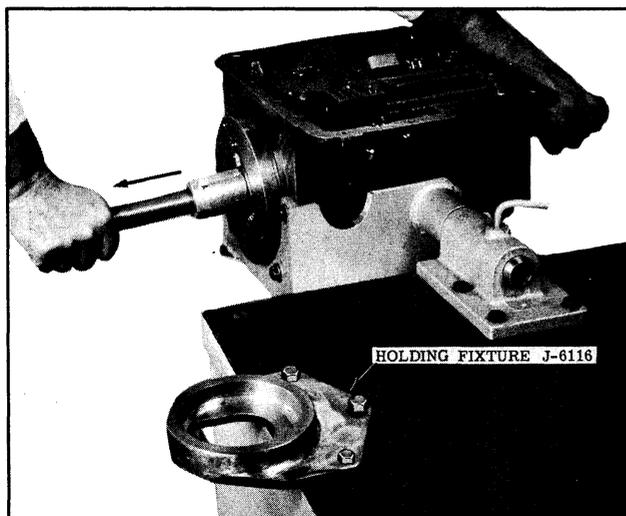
Removing Case Support, Neutral Clutch & Rear Unit
